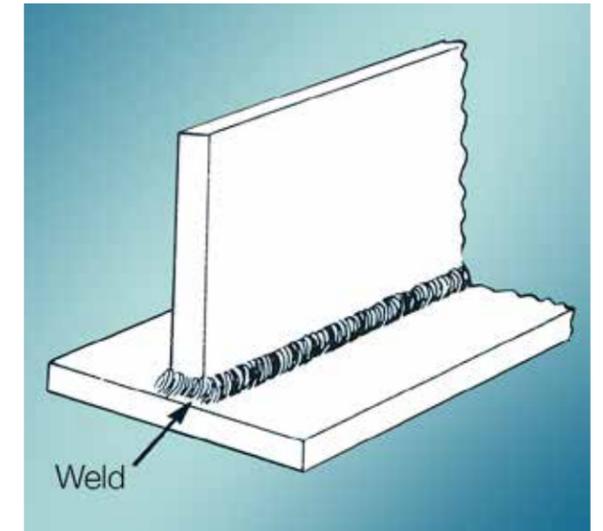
Seal the ends on a double fillet weld so that acid cannot penetrate into the gap.
